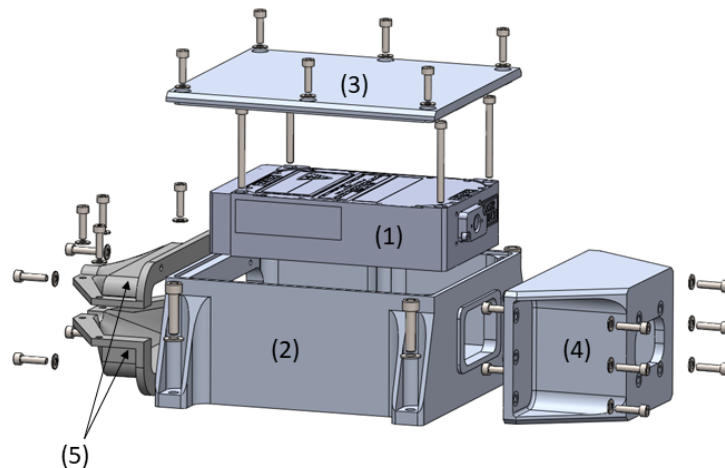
Exploded view of the *Laser Head Module*, highlighting the: (1) laser head, (2) laser frame, (3) laser frame lid to be able to access the laser from above for mounting, (4) interface bracket to the *Modular Frame for Optics* designed for this laser head. Cavity inside the bracket to accommodate the *Beam Expander*, which connects to the laser head, (5) two half caps to enclose laser head cable and seal the frame. The power resistor mounted next to the laser head is not modeled.
